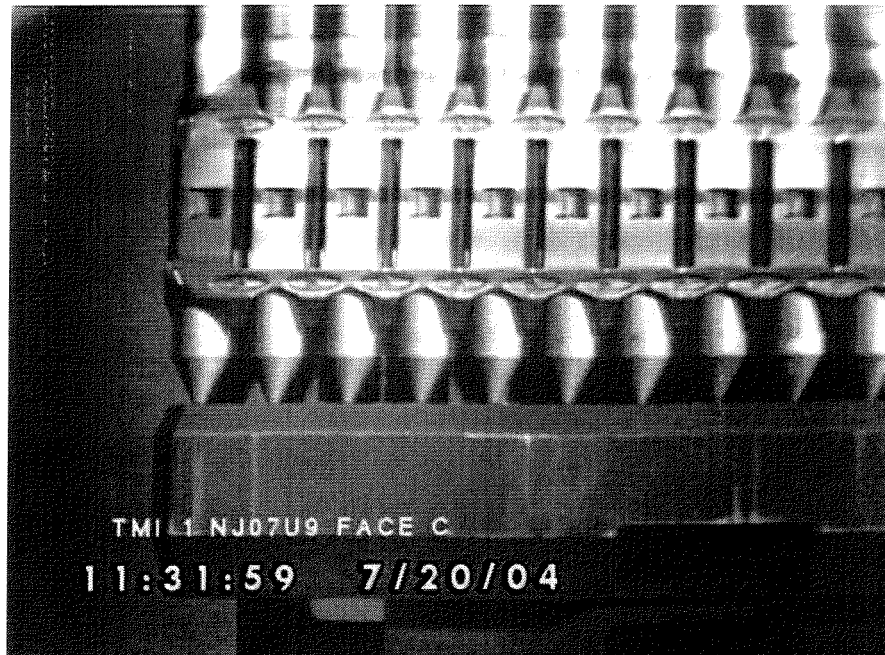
Photograph of Assembly NJ07U9 First (Bottom) Grid Span (M5 Fuel Rod Eighth From Left)
